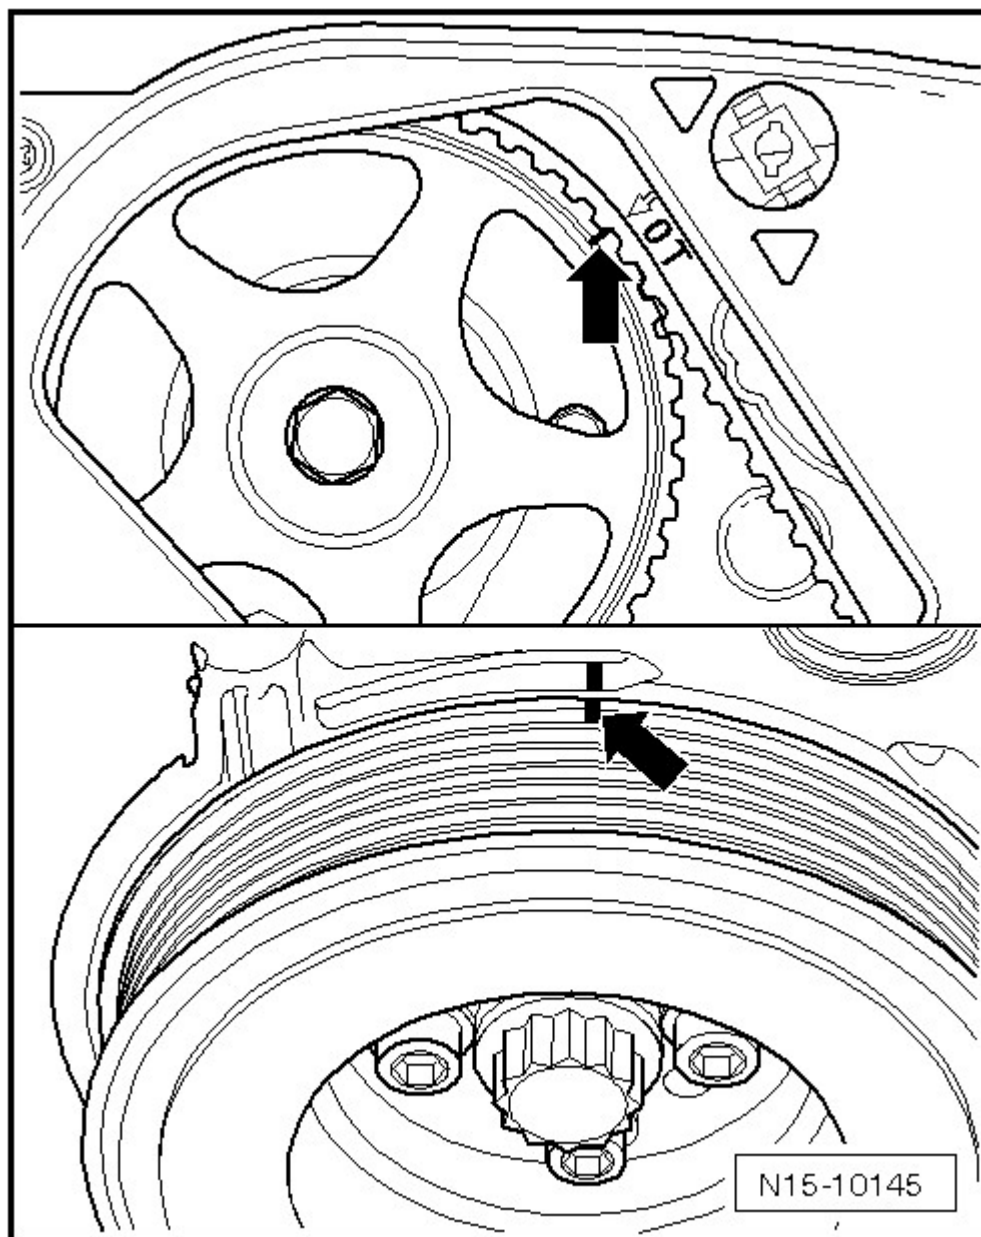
Bringing Camshaft Gear To Marking For TDC Cylinder 1
